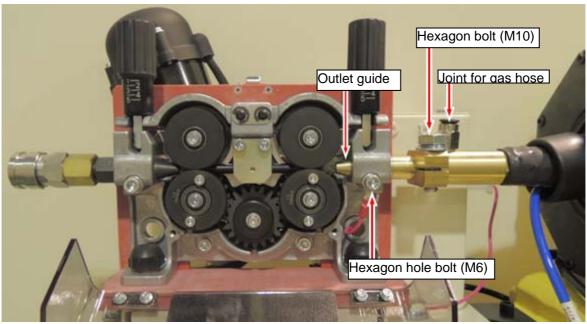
(e) Remove the thumbscrews of wire feeder
